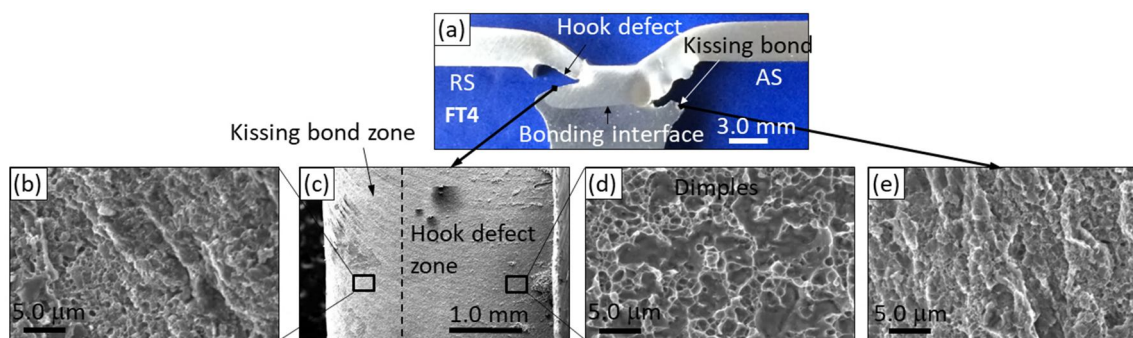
(a) Fracture location and (b-e) fractography of FT4 at welding rate of 50 mm/min.
